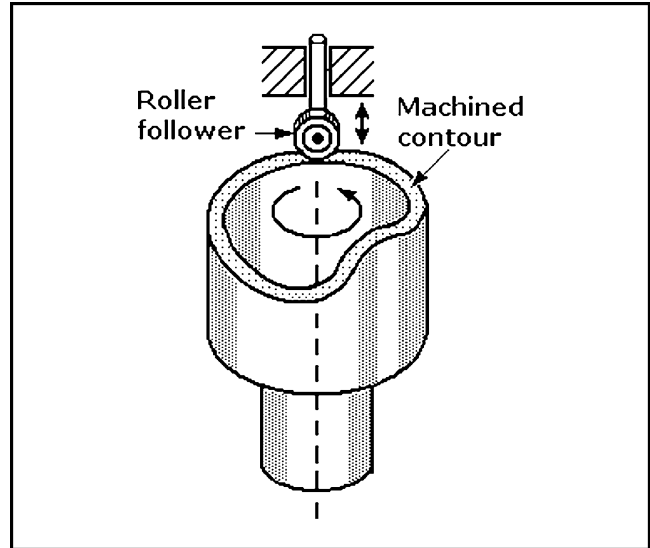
End cam: A roller follower tracks a cam contour machined at the end of this rotating cylindrical cam.
